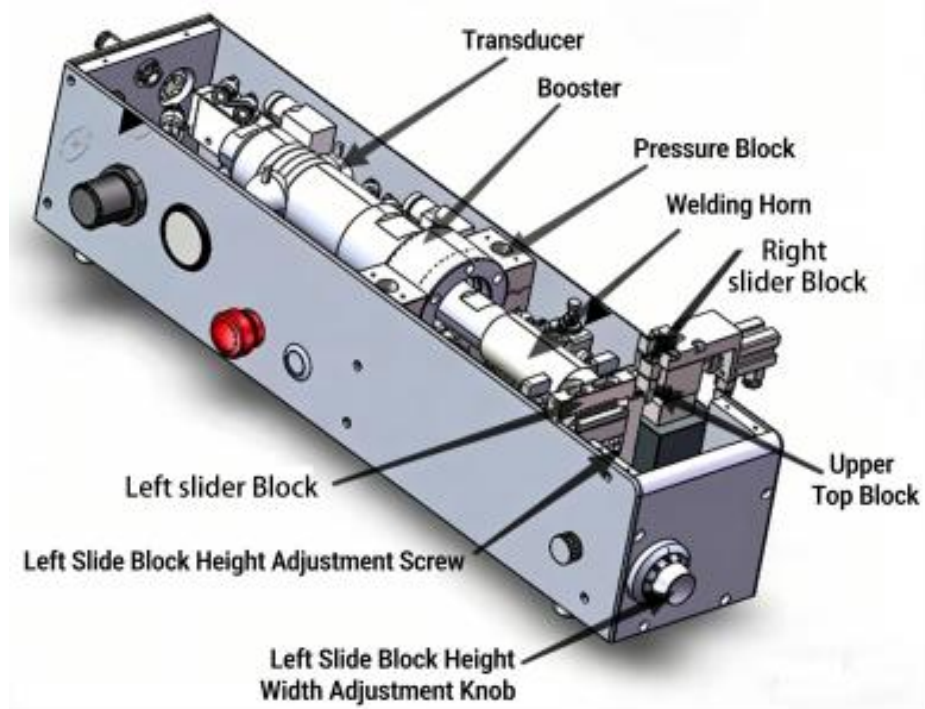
CGXS-2026 Ultrasonic Wire Harness Welding
